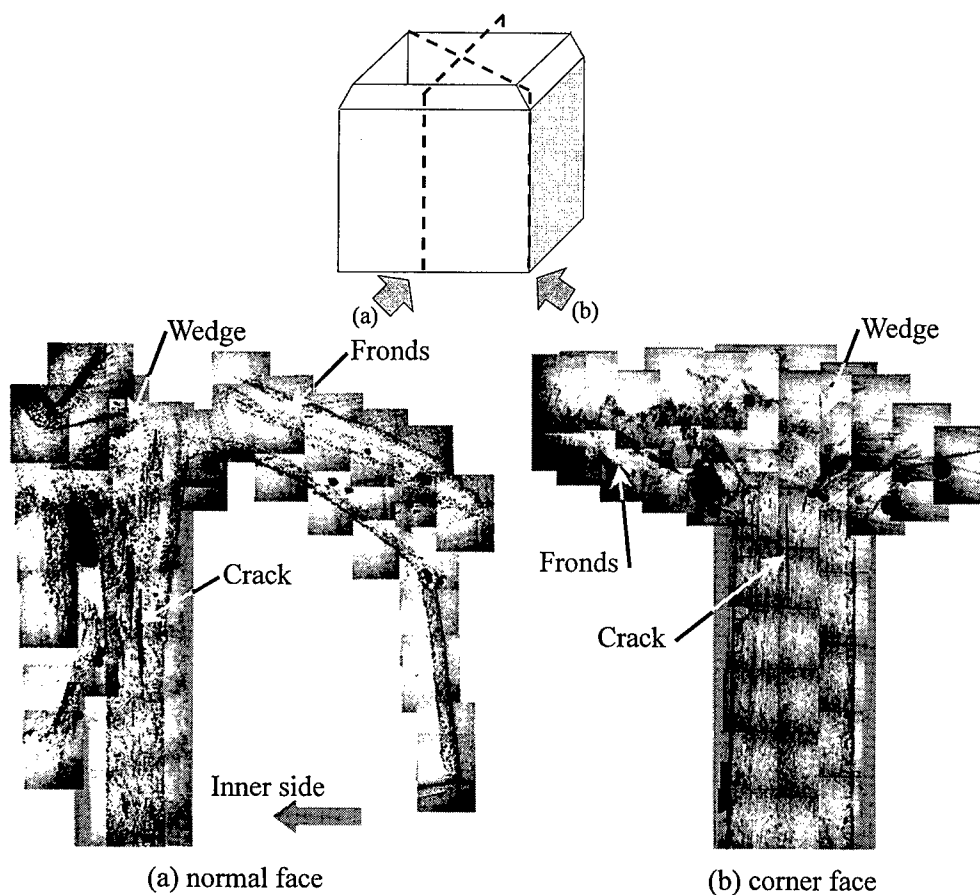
Cross-sectional photograph of rectangular pipe in static test
